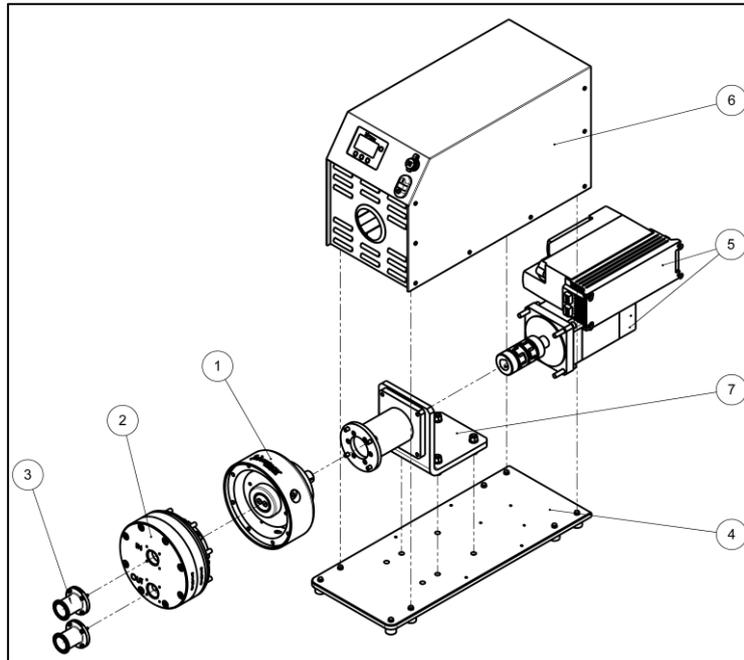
Sub-assemblies QF5KQCon - QF5KQCON-ACUEGNT
